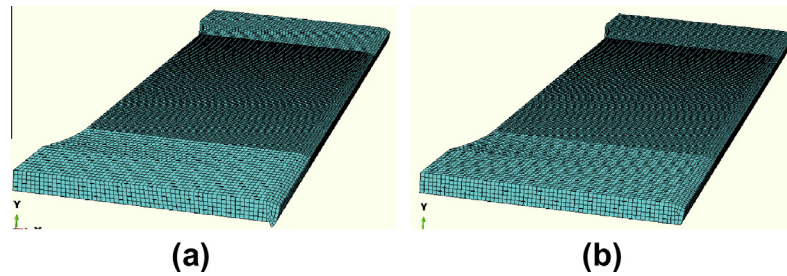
An example of models for 43% trimming clearance before (a) and after (b) the burr is removed.
